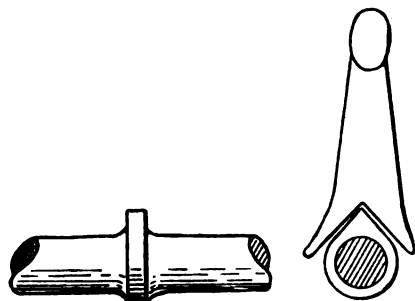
ALTERNATIVE METHOD OF FORGING AND WELDING.
